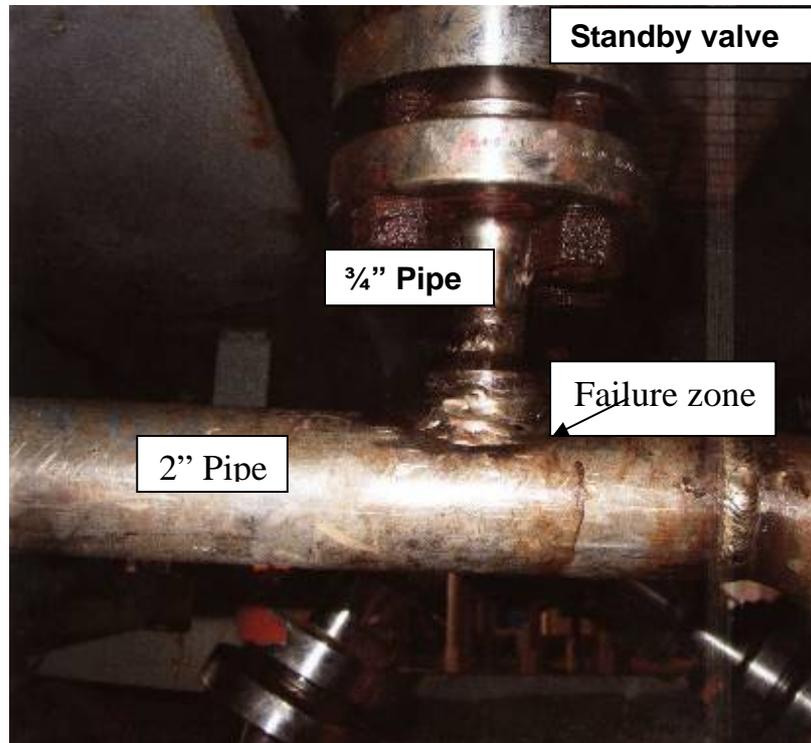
Part of condensate recycle line showing $\frac{3}{4}$ " pipe branch fillet welded to 2" main horizontal line where leakage has occurred.
